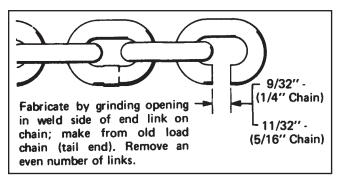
Open "C" Link for Removing and Installing Coil Load Chain
